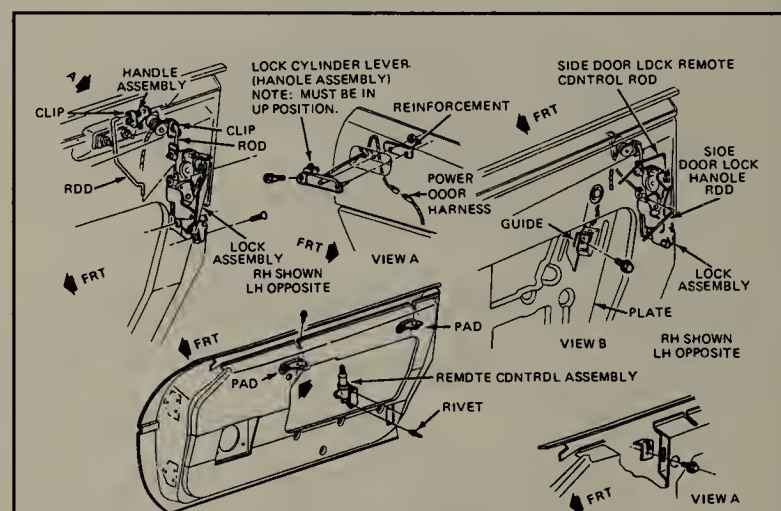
Exploded view of the door lock and remote control system—1984-88 vehicles
